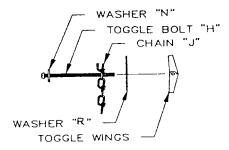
Fasten to hollow wall, plaster, drywall, etc.
